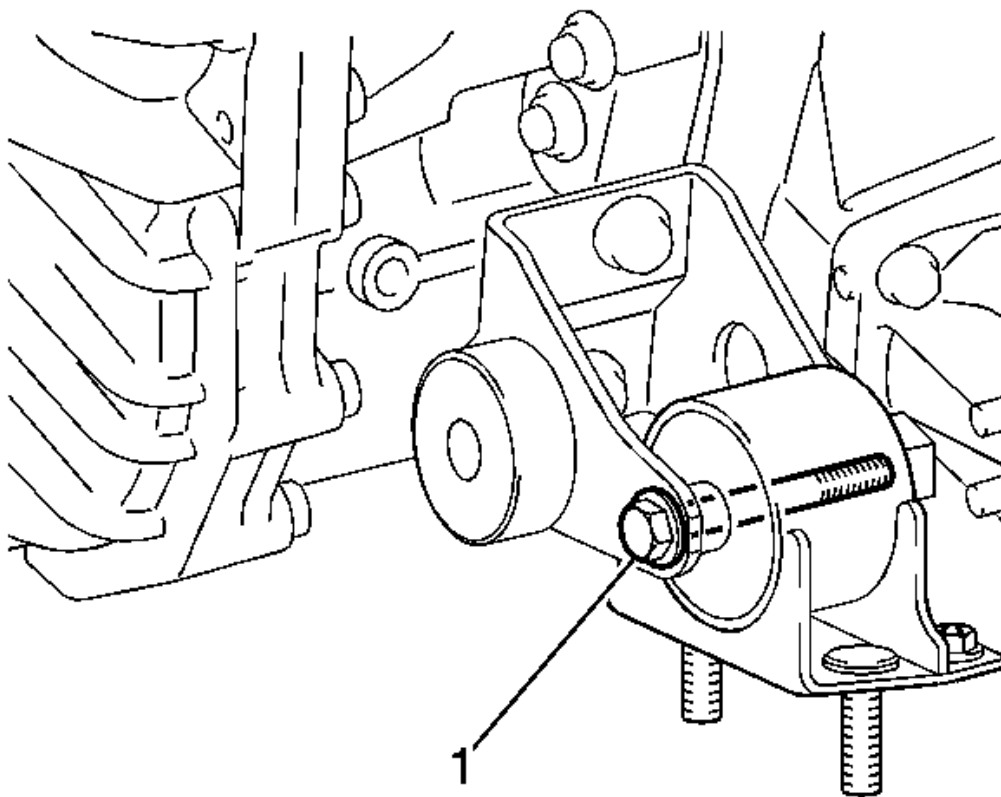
Identifying Rear Engine Mounting Insulator Through Bolt - 4WD
